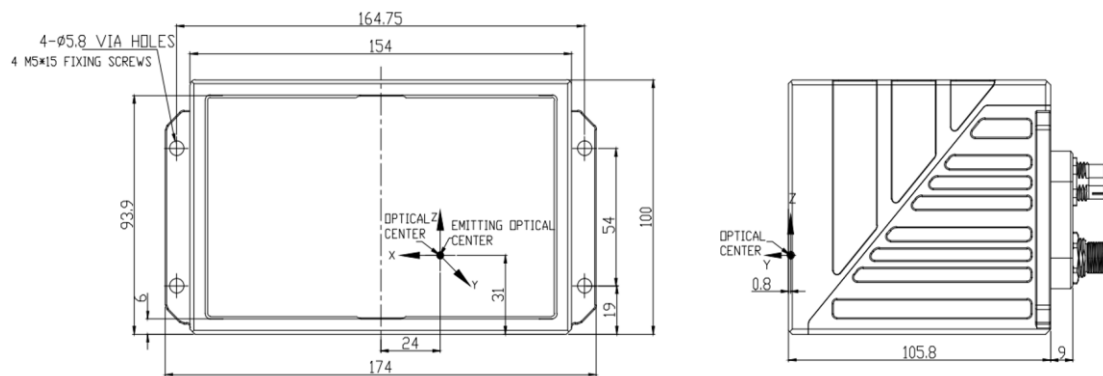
CH256X1 Lidar Dimensions (unit: mm)
